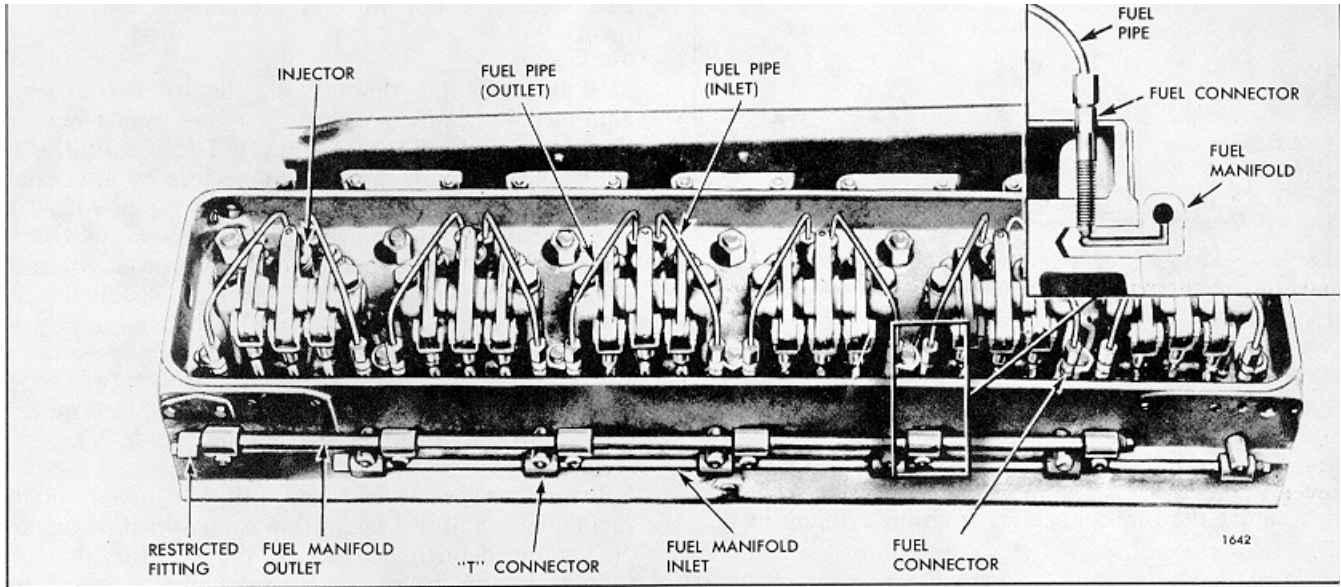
Former Cylinder Head with External Fuel Manifolds
